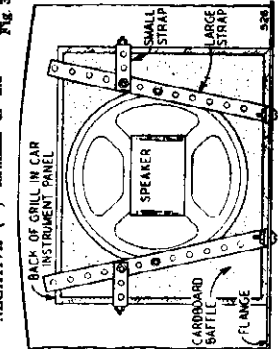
External Speaker Connections. One Method of Mounting and Fig. 5—Mounting Speaker in Back of Instrument Panel Grille
